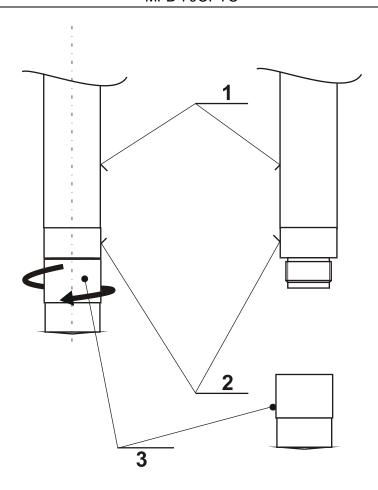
Sensor CSOT 53LZ-S – membrane head exchange
